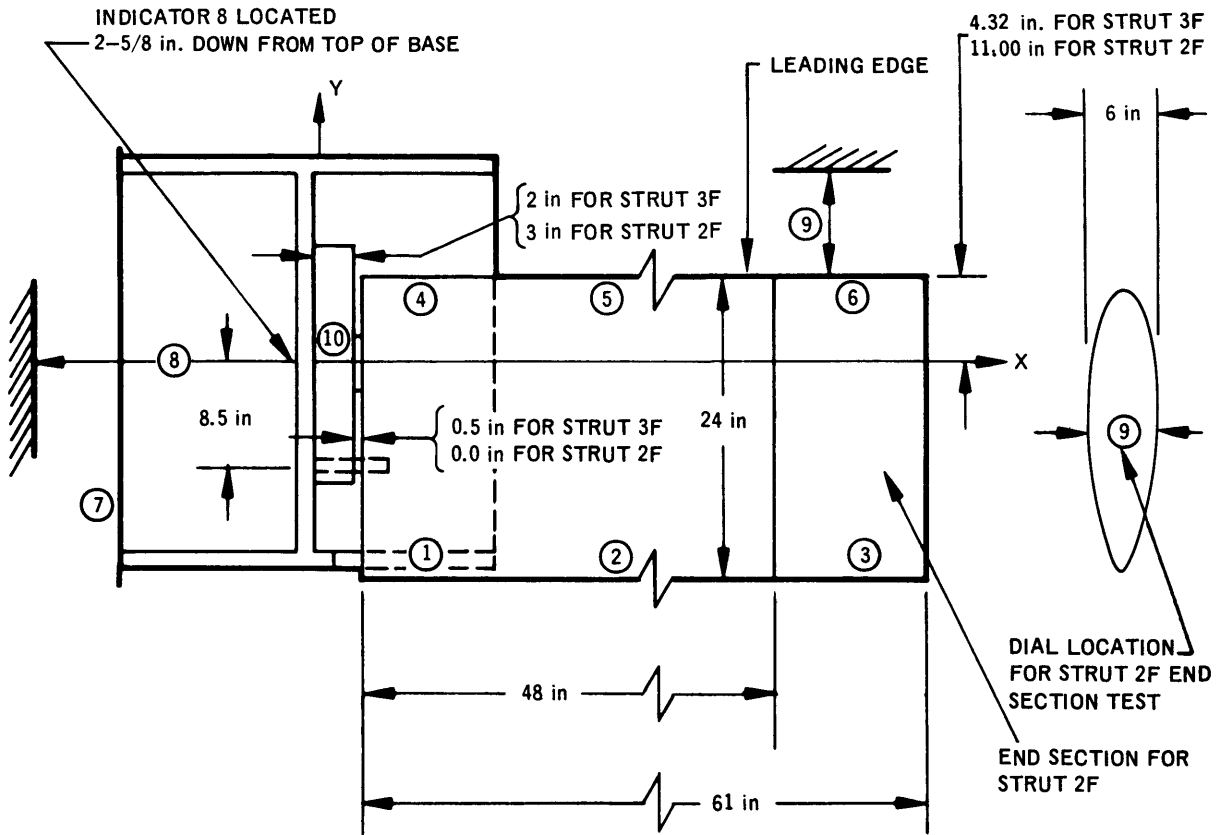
Base Used to Mount Struts for Structural Loading Test
